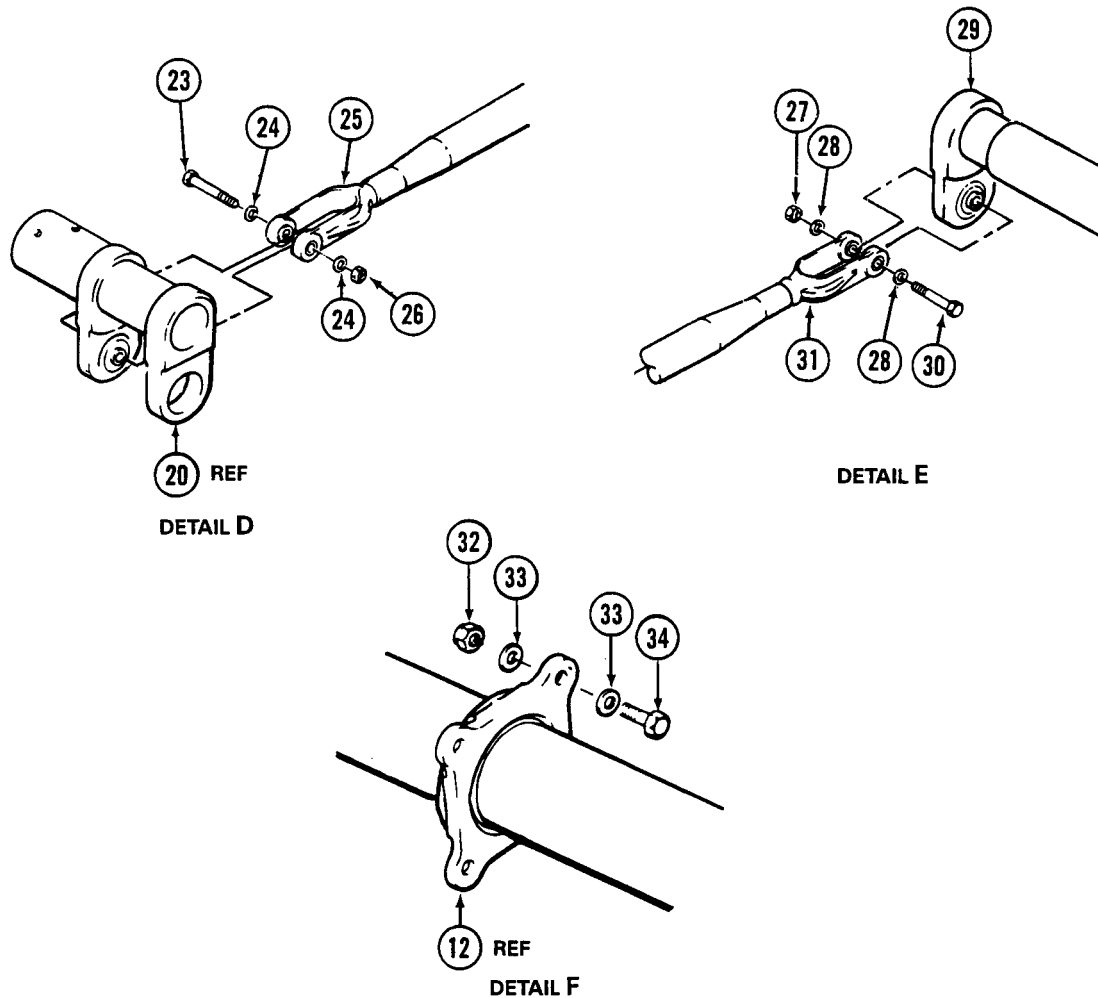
Tube and lever assemblies — cyclic control system — disassembly and assembly (Sheet 1 of 2)
